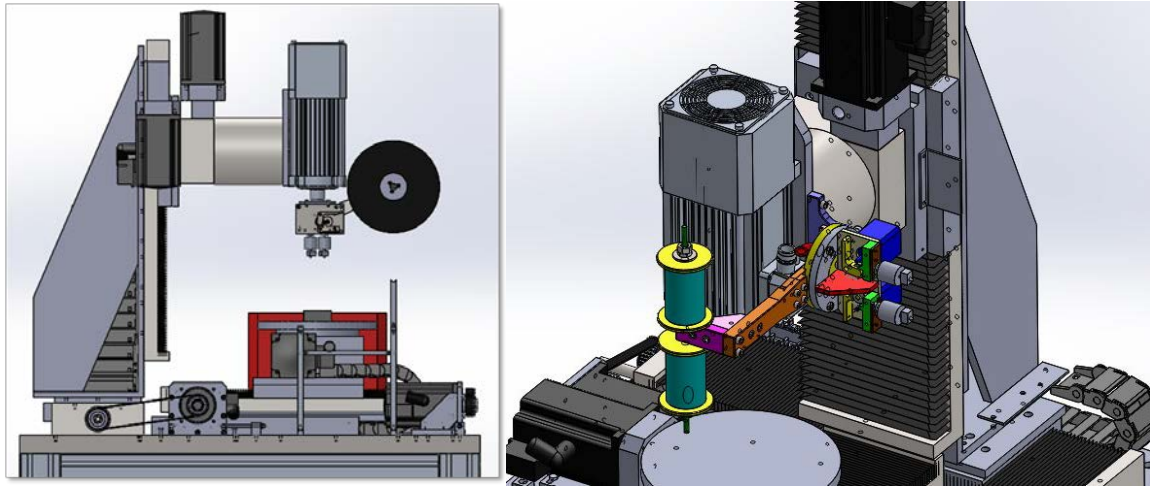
Hybrid manufacturing system with a) tool change (left) and b) revolver (right)
